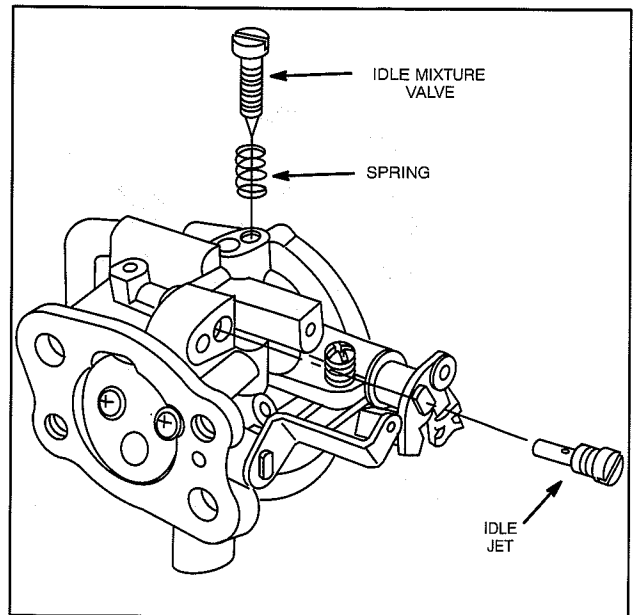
Removing Idle Mixture Valve And Idle Jet
